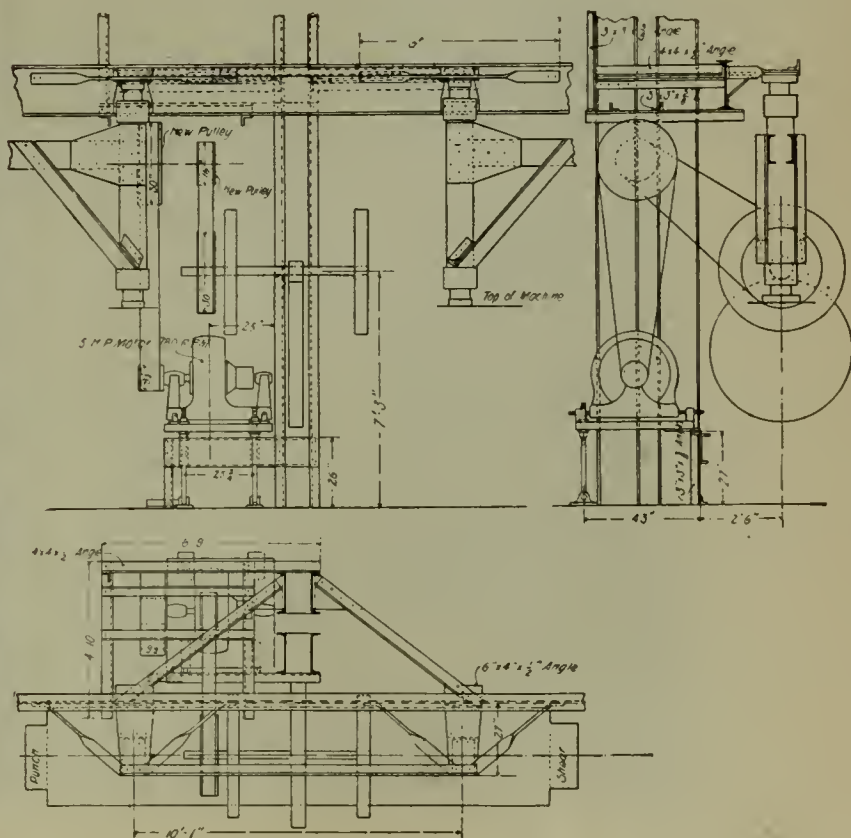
ERECTING PLAN OF MACHINE AND EQUIPMENT APPEARING IN ADJACENT COLUMN.
